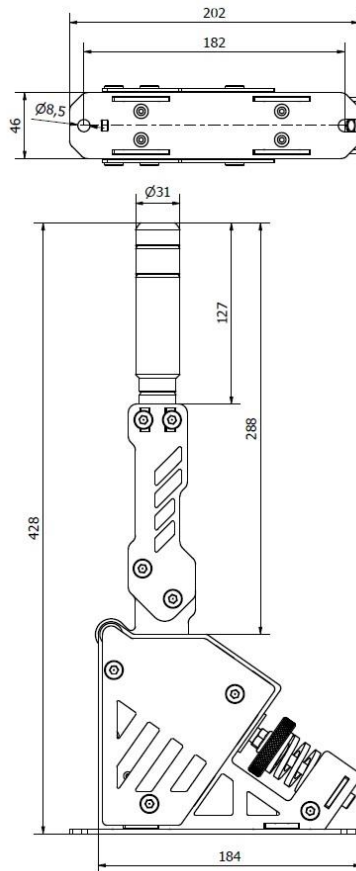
Dimensions of the TAU SEQUENTIAL SHIFTER V2 along with the mounting holes.
